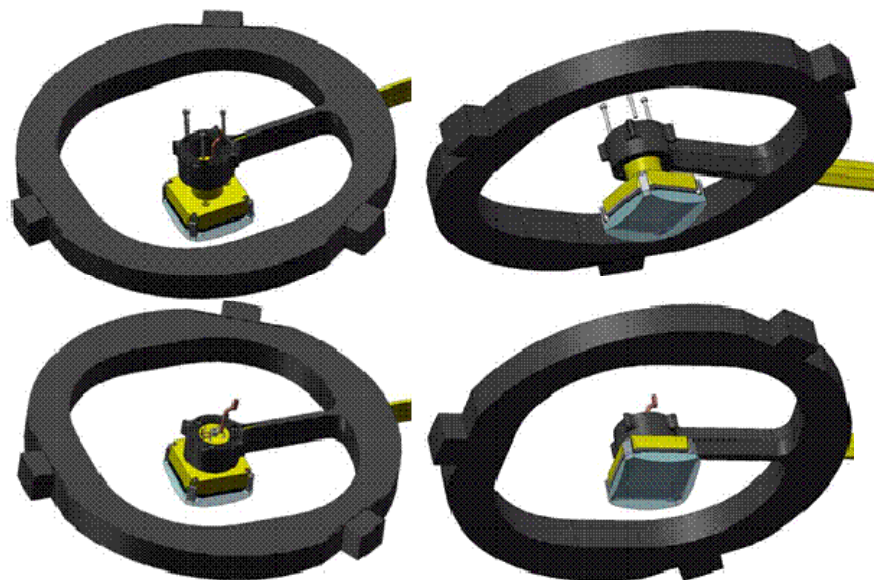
The FFLA/CCD/CBA assembly attaches to the spider via three screws. Note that the vacuum electronics interconnect and bulkhead connector is not shown in this figure.
